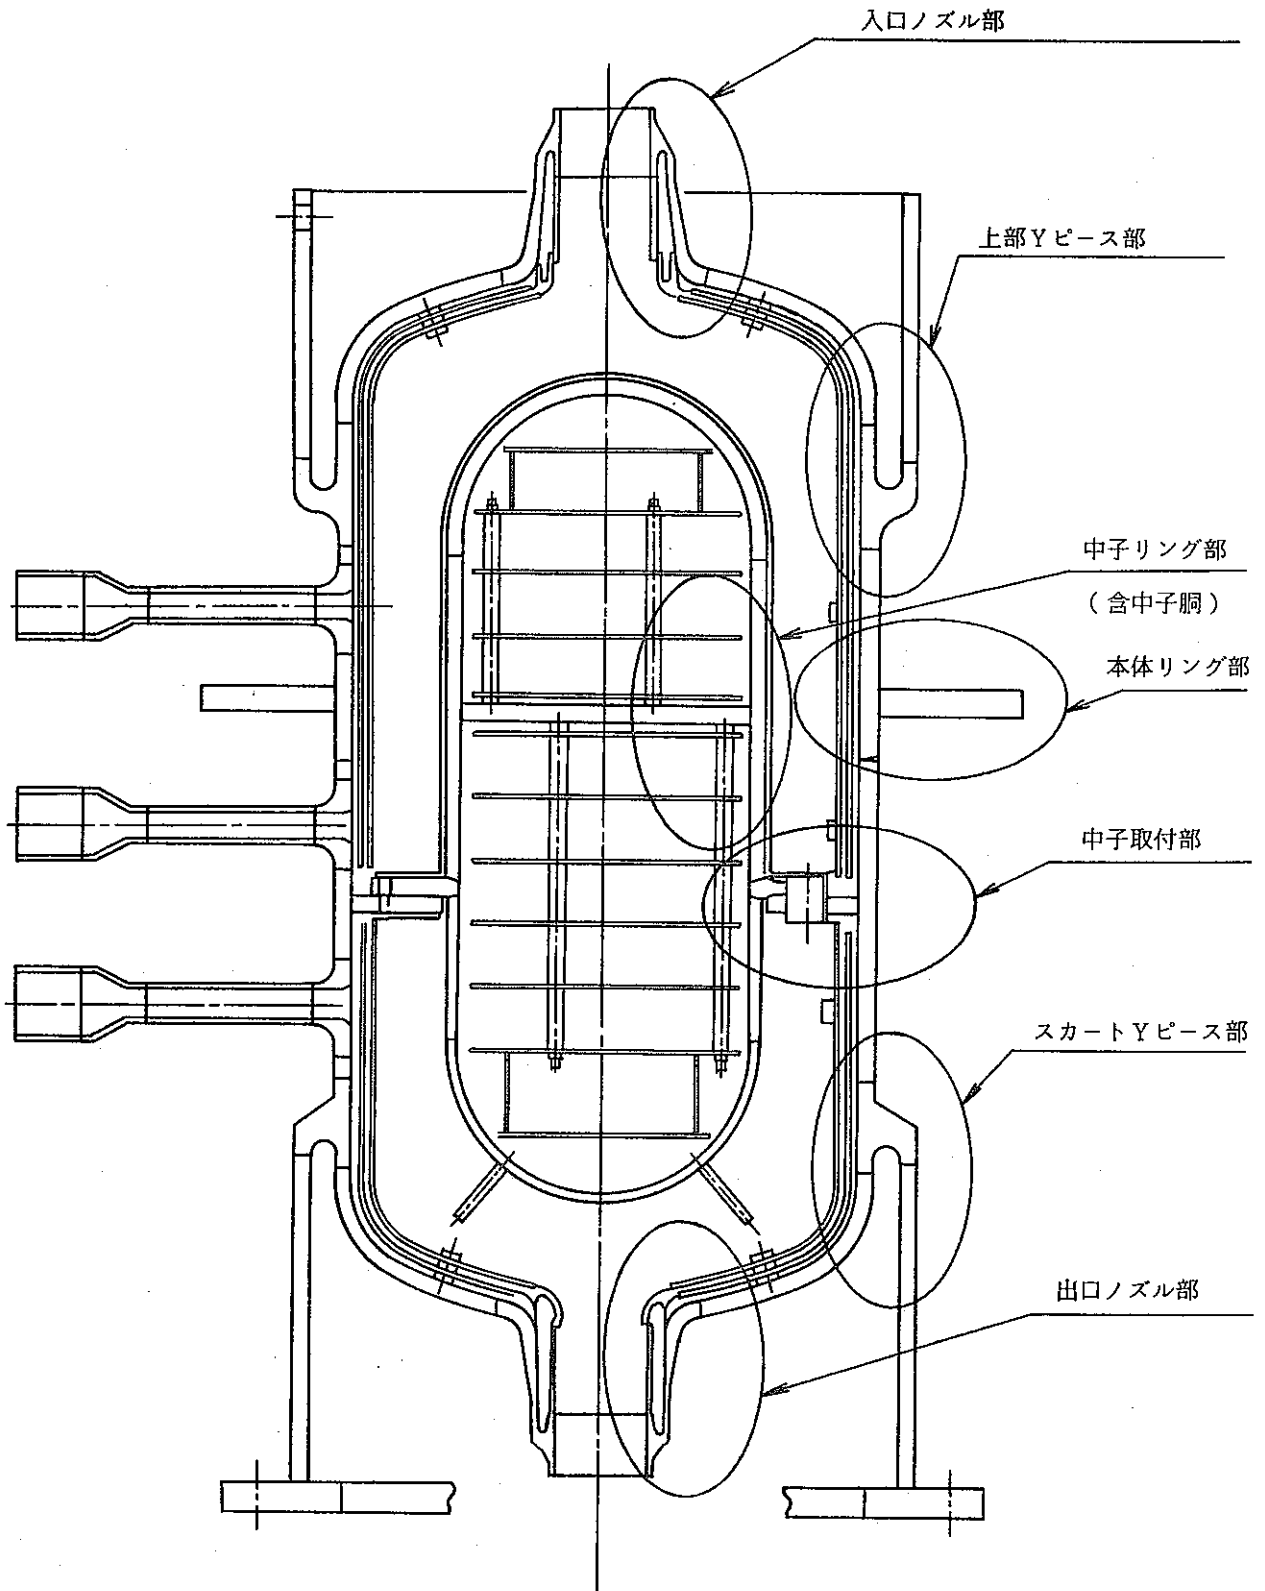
Configuration of Welded Vessel Model
